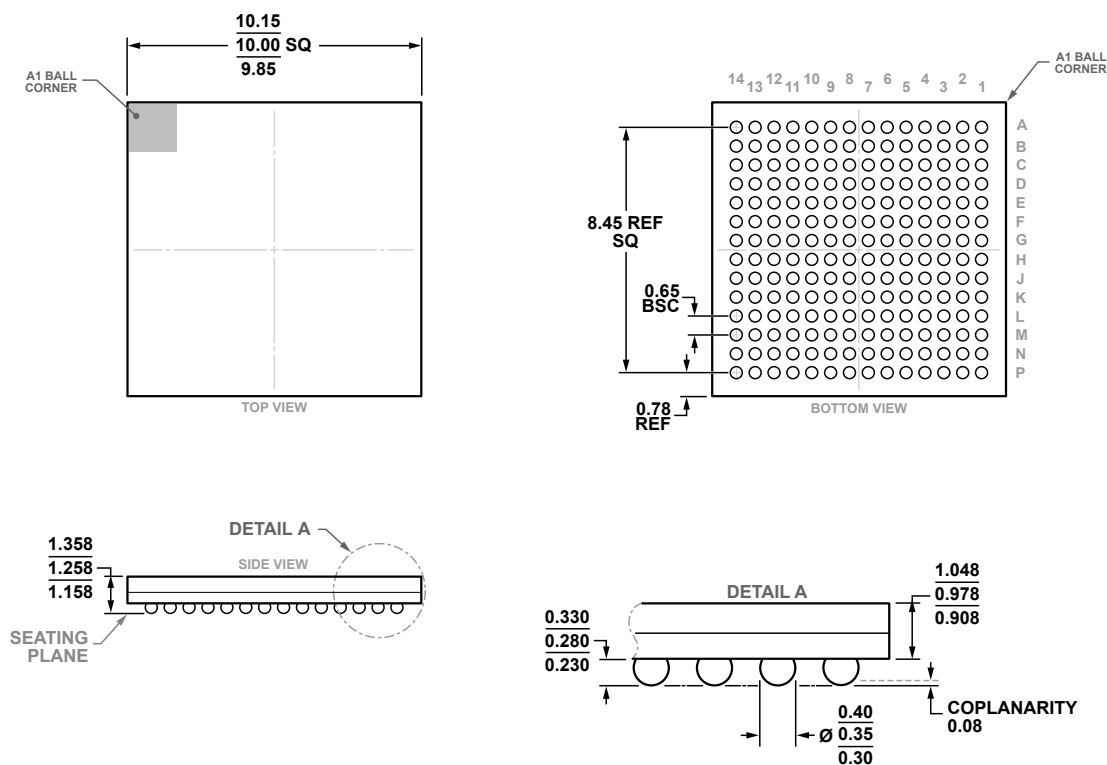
196-Ball Chip Scale Package Ball Grid Array [CSP_BGA]
